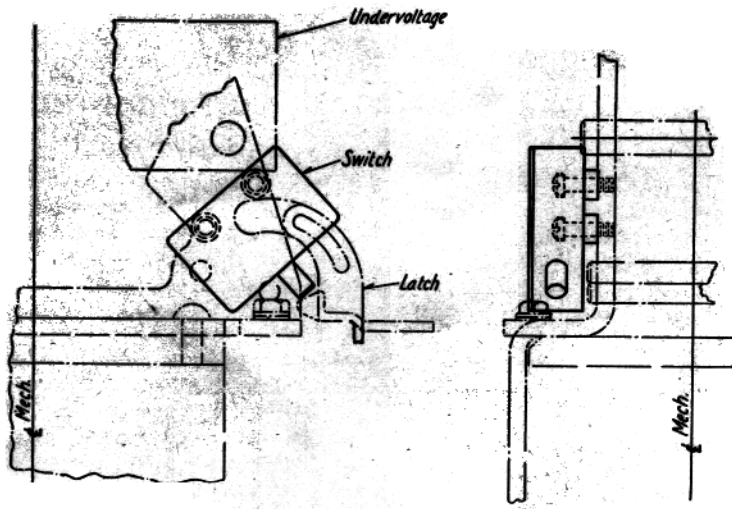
LATCH CHECKING SWITCH ASSEMBLY
